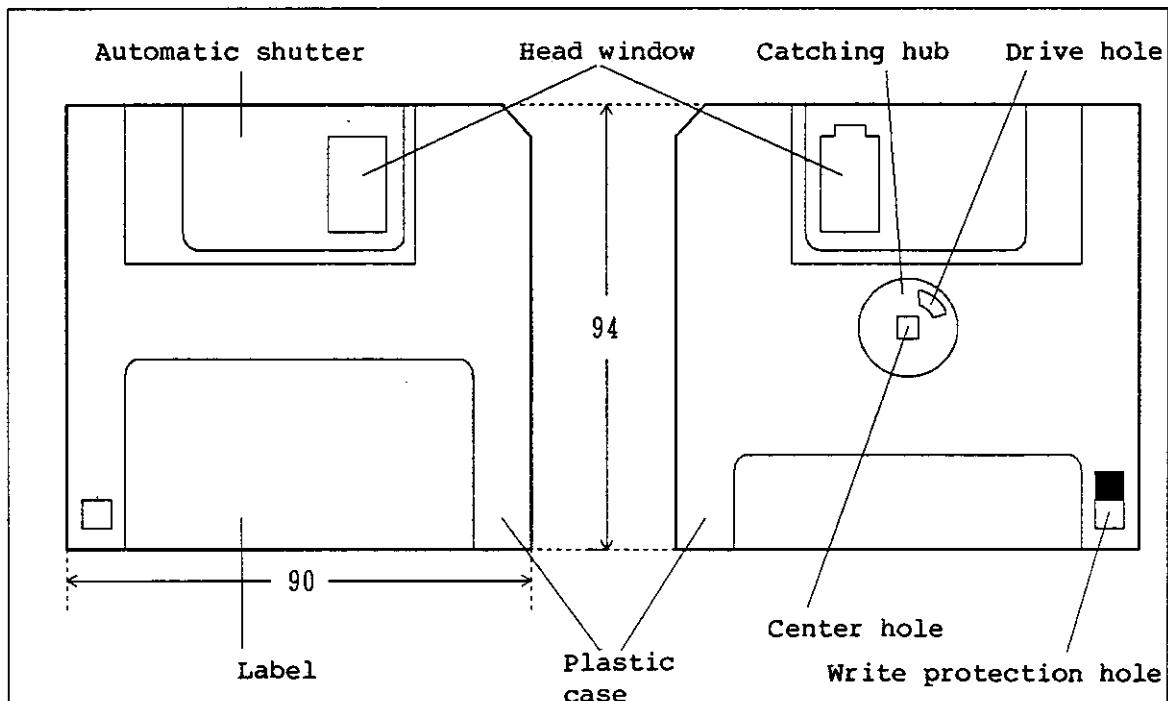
1 Floppy Disk Dimensions and Component Parts
